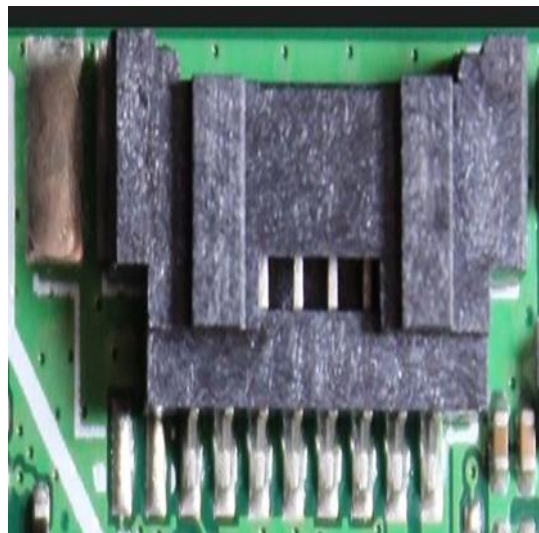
Examples of Defect-Free PCBs.
